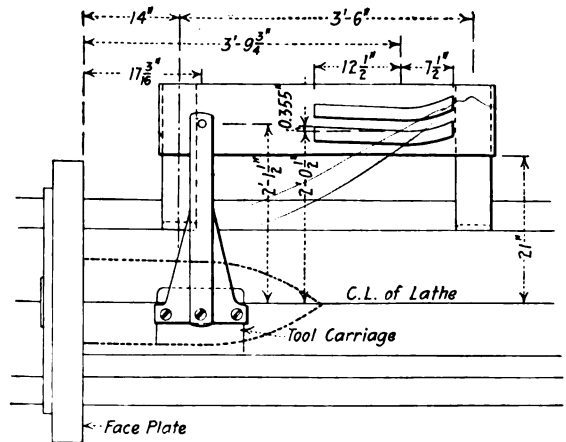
ARRANGEMENT OF PROFILING FIXTURE
